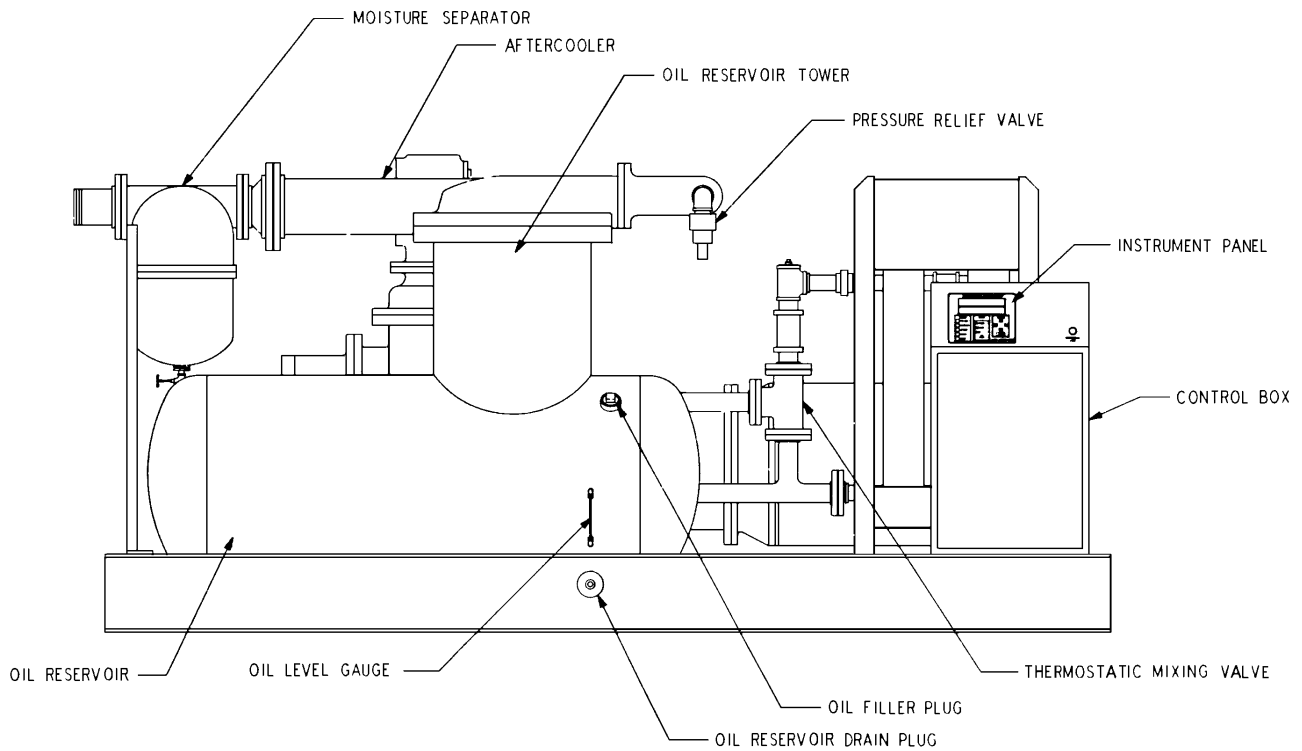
VIEW OF WATER COOLED UNIT WITH AFTERCOOLER (LESS ENCLOSURE) RESERVOIR SIDE
